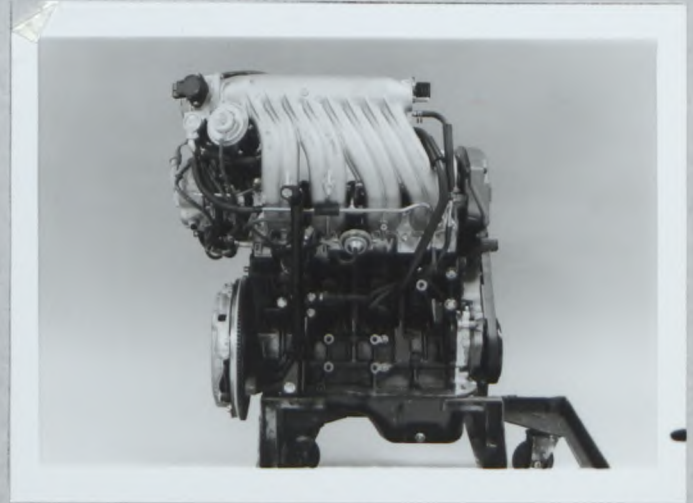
LEFT HAND VIEW OF DISMOUNTED ENGINE
